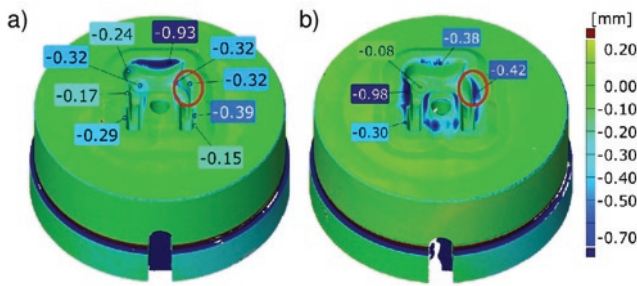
Scan results of UNIMAX steel inserts used in the hot forging process: a) 16000 forgings with a new lubrication system, b) 16000 forgings with an old lubrication system
